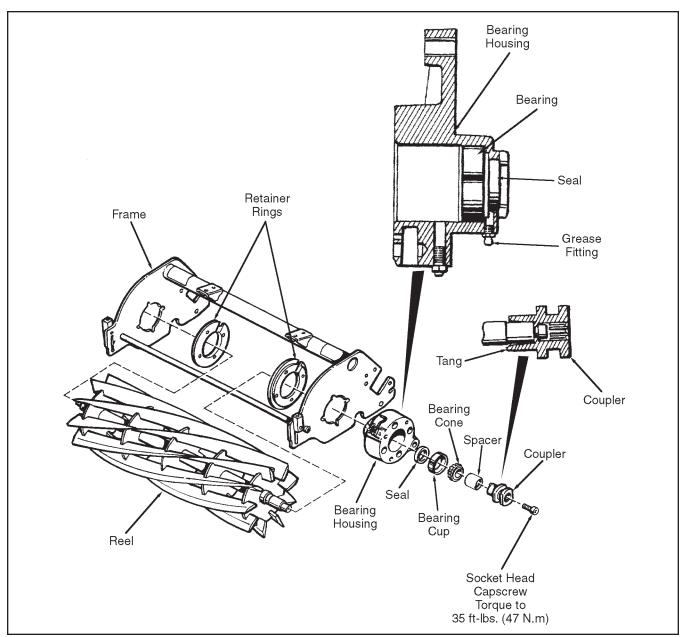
G-5. Reel Reassembly (Steps 1 to 12)
